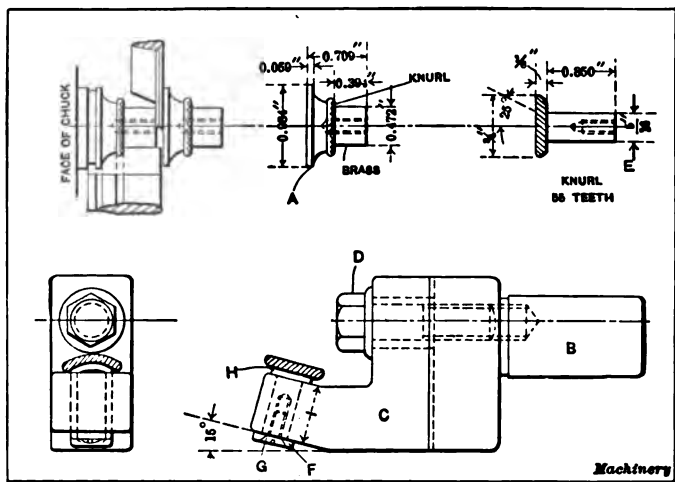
End-knurling Tool held in Turret and Operated at an Angle
